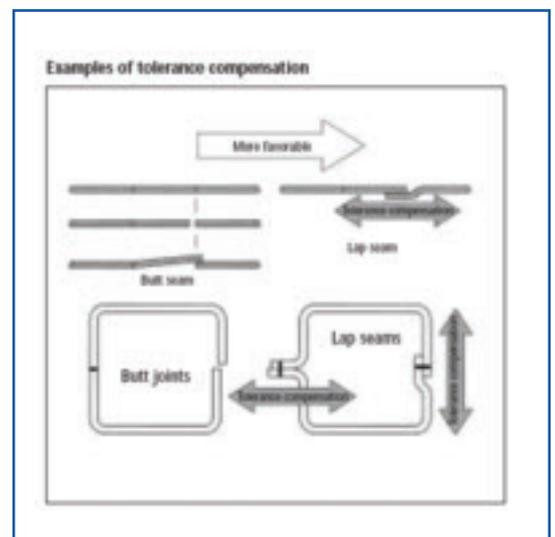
Typical welding geometries and strategies to reduce the requirements on edge preparation and parts tolerance.
